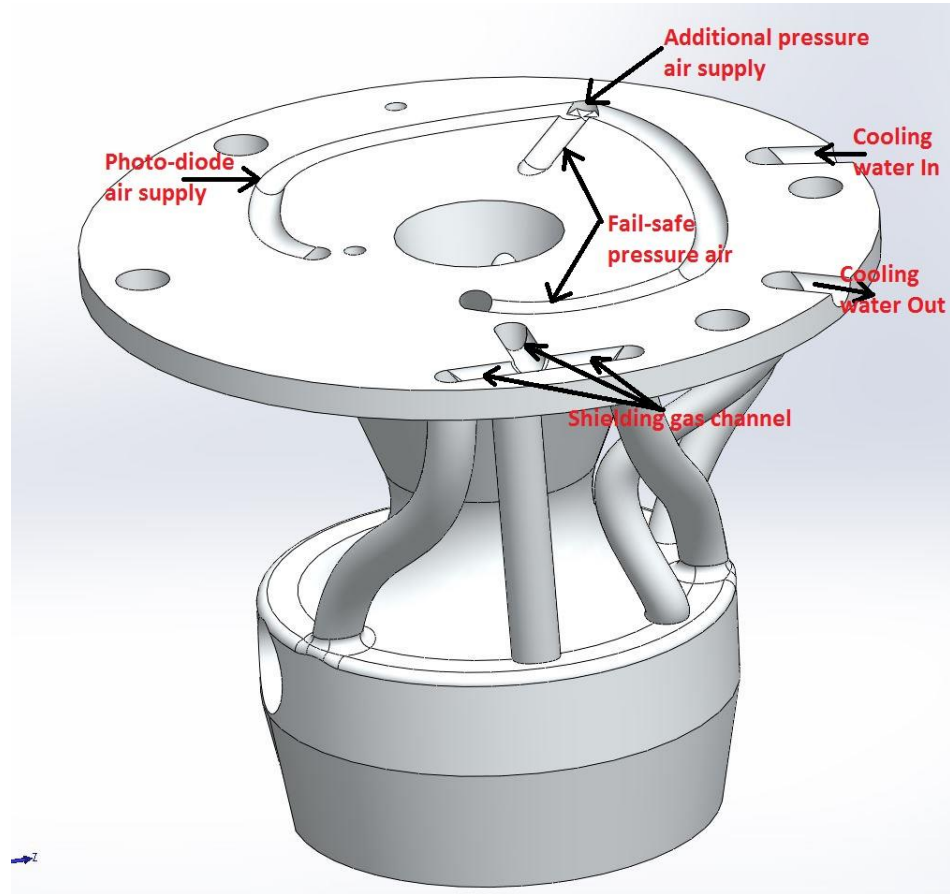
Top plane cross section representing inner tubes for pressure air and shielding gas.
